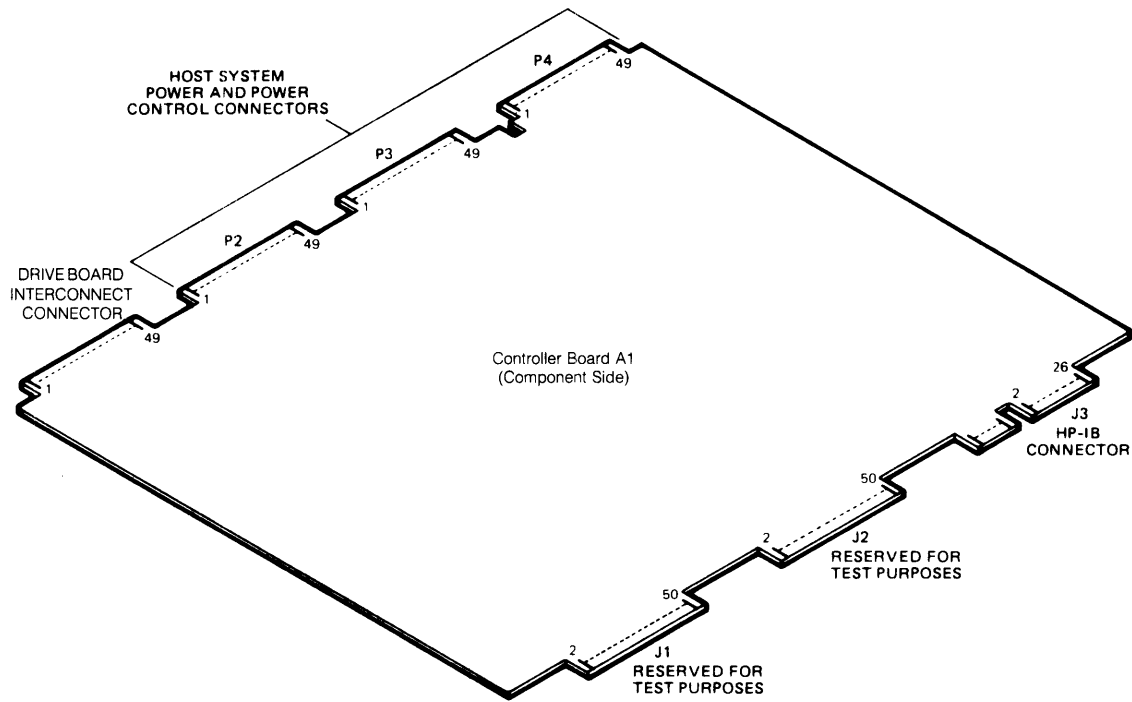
Controller Board A1 (07902-60024) Connectors
